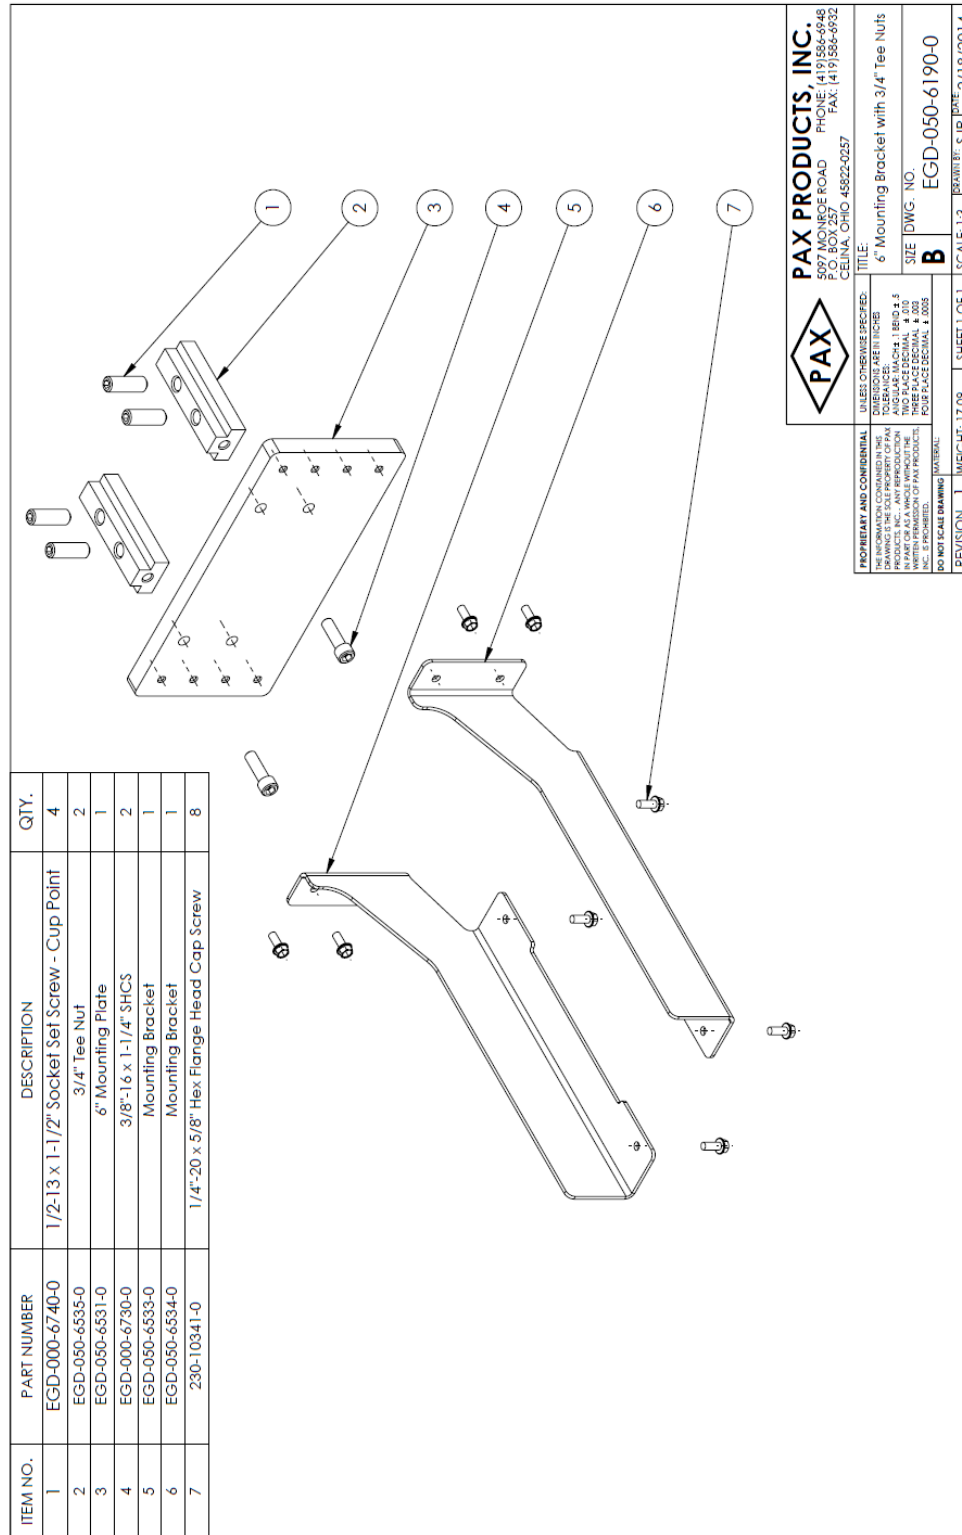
EGD-050-6190-0 6" MOUNTING BRACKET WITH 3/4" TEE NUTS
